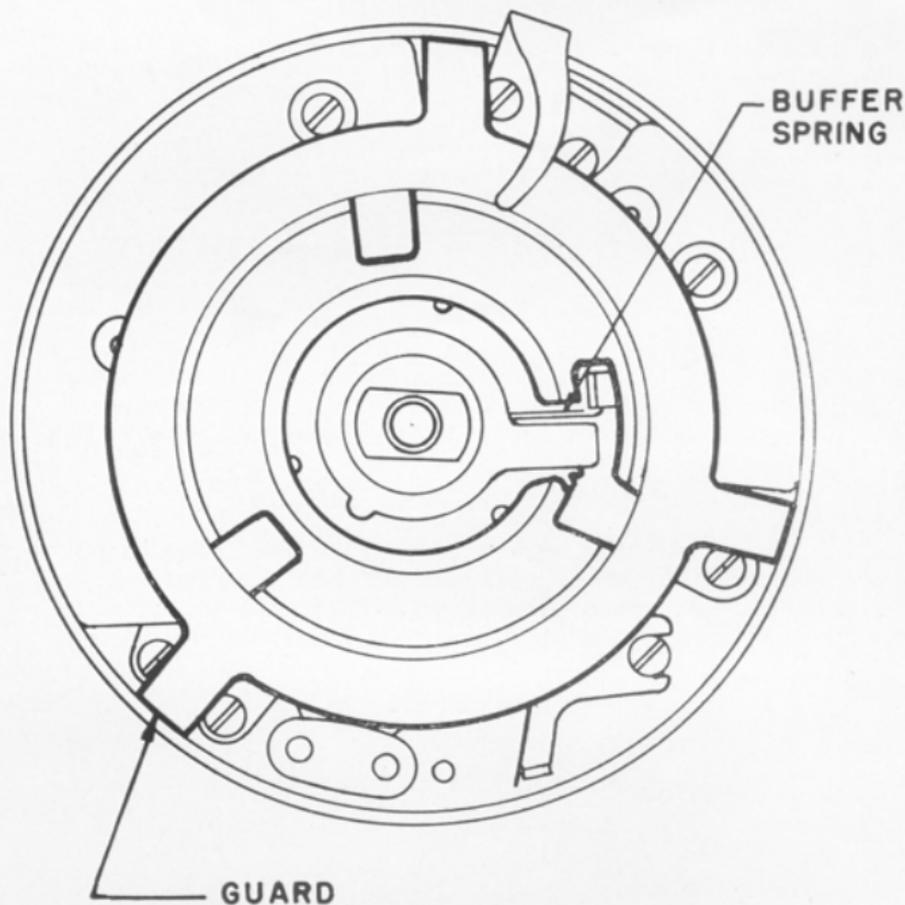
5-Type Dial Showing Buffer Spring and Metal Guard
